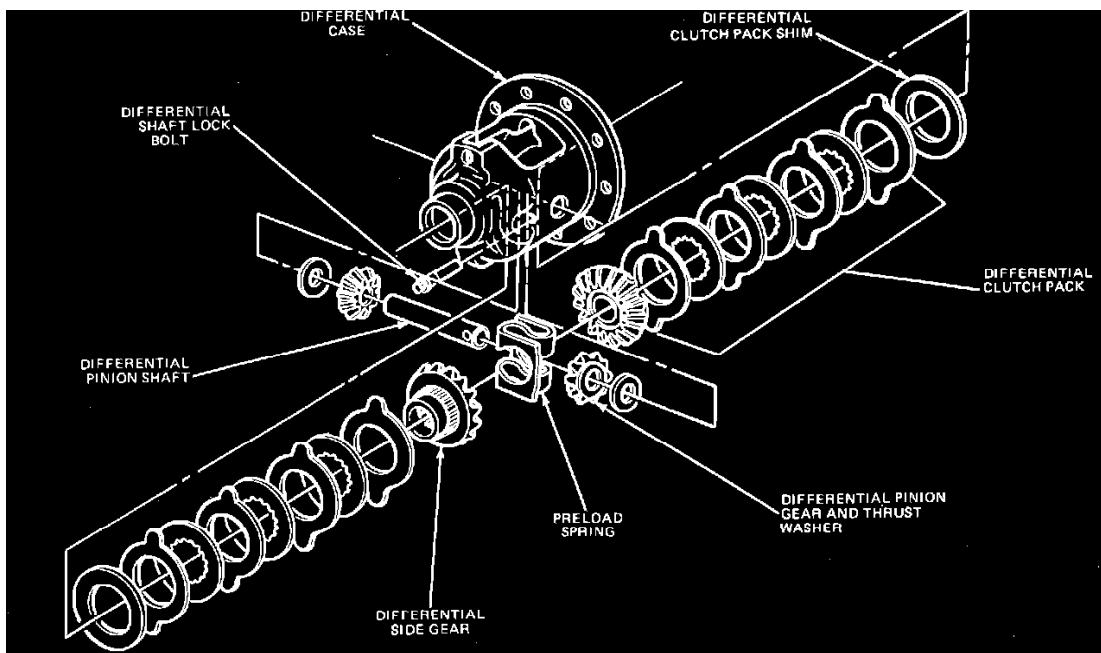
Exploded view of clutch type Traction-Lok limited slip differential
